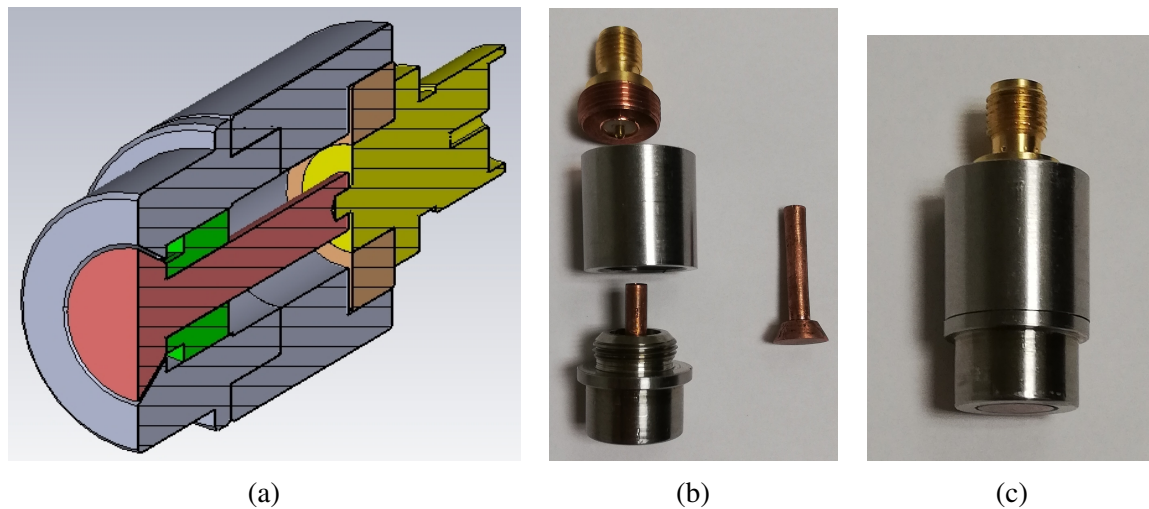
Manufactured PU: (a) cross-section, (b) disassembled, (c) assembled.
